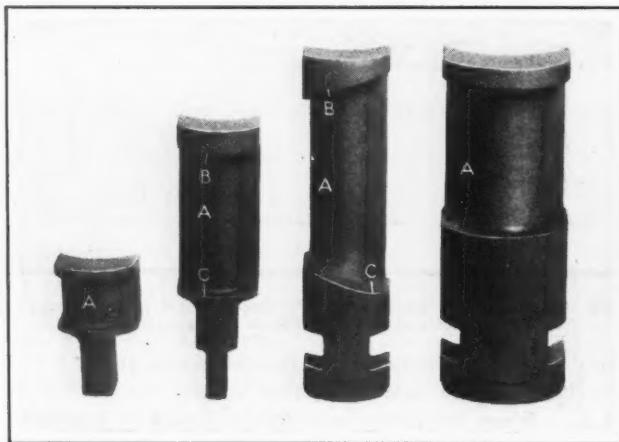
Impulse Blades installed in the Rotor and Stator of Steam Turbines
